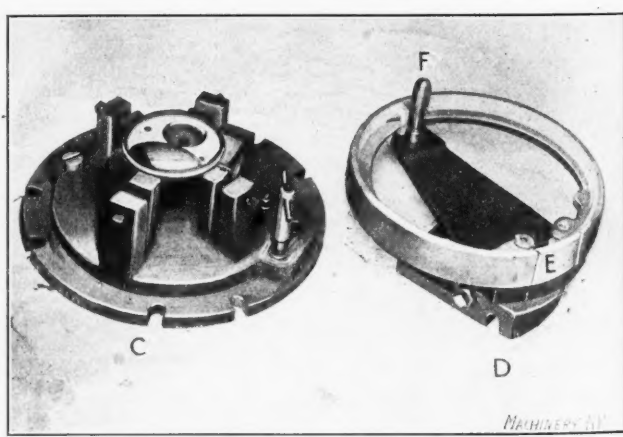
Fixtures used in Surfacing Part of Muffler and Cutting Brake Band
